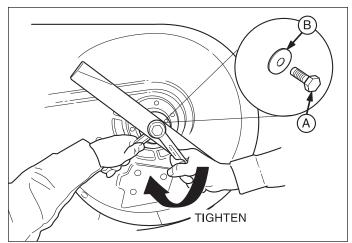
Installing The Blade A. Blade Bolt B. Flat Washer
